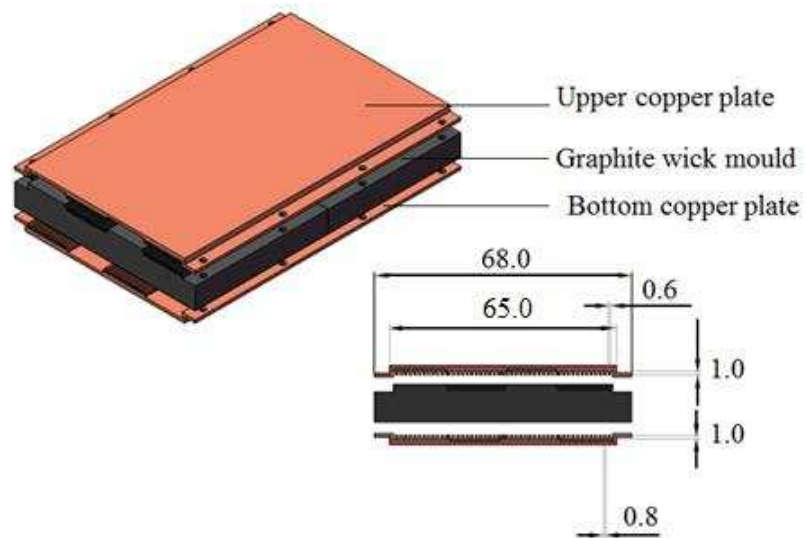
FPHP fabricating assemblies with dimensions in mm.
